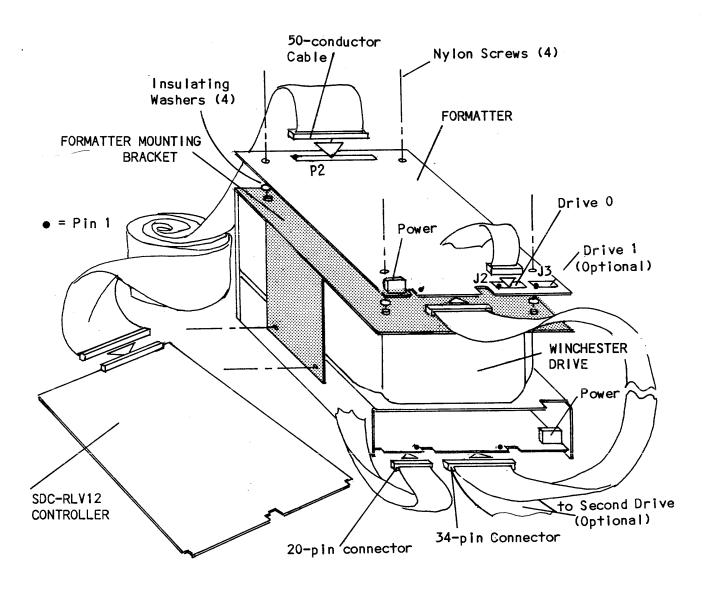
WINCHESTER CONTROLLER/DRIVE CABLING
